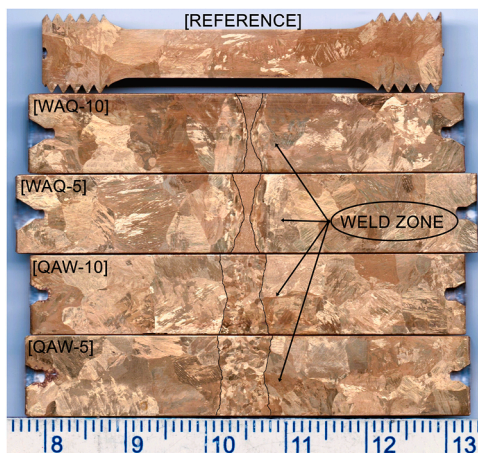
Macrographs of base metal and samples welded by CDFW.
